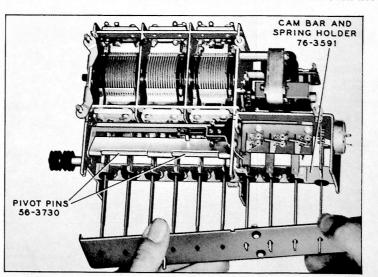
REPLACING FRONT-PLATE ASSEMBLY
